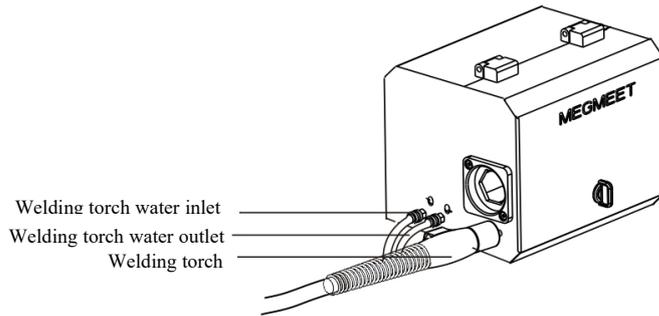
Connection diagram of the robot welding torch
